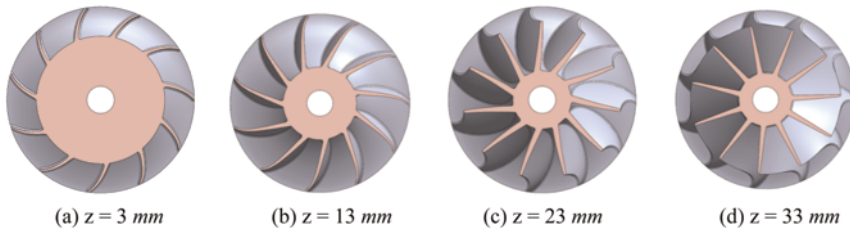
Cross section views of a rotor wheel showing the non-radial blade fibres.
